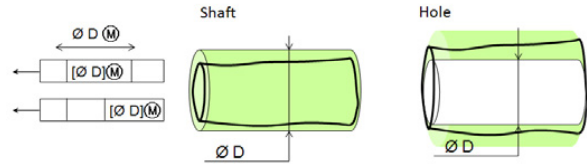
The maximum material tolerance zone for a cylinder
